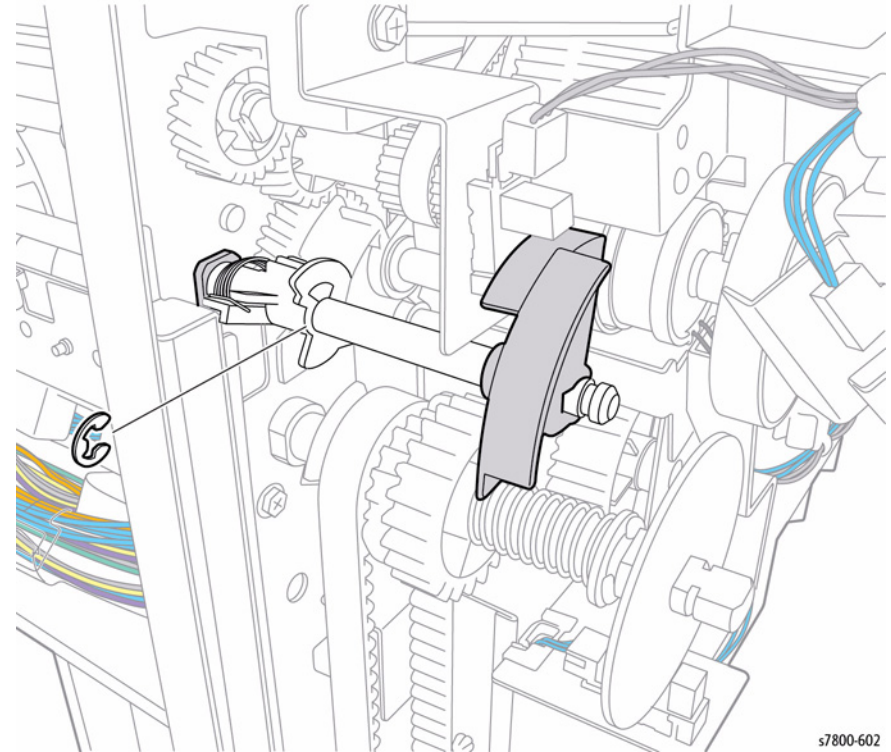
Removing the Actuator, E-Clip, Spring, Gear, and Bearing
